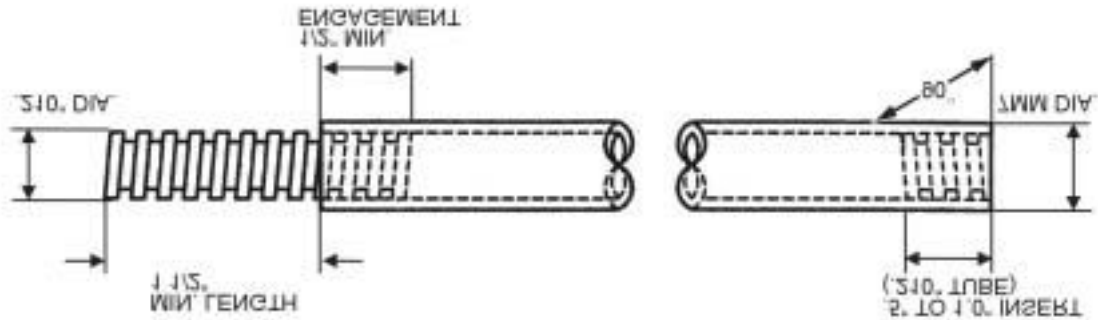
Flexible Deflector Tube Assy. Fabrication
